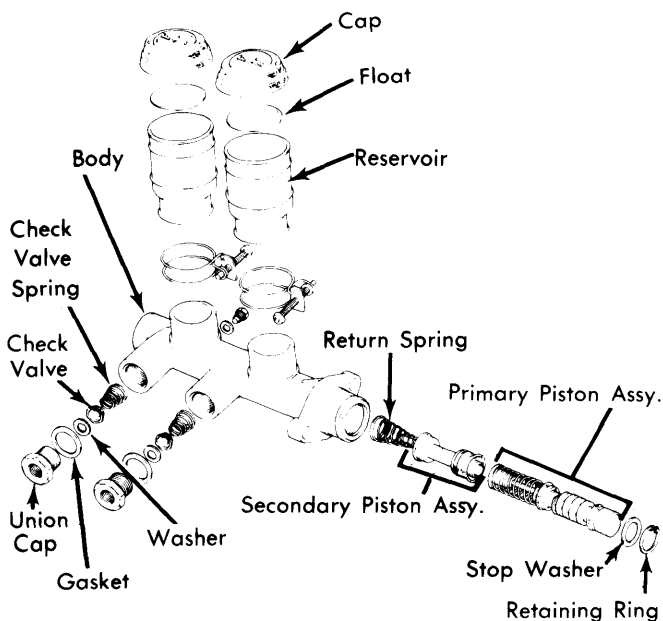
Master Cylinder Reservoir Body and Piston Assemblies
